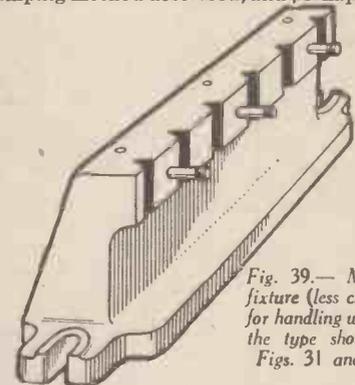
Milling fixture (less clamps) for handling work of the type shown in Figs. 31 and 32
